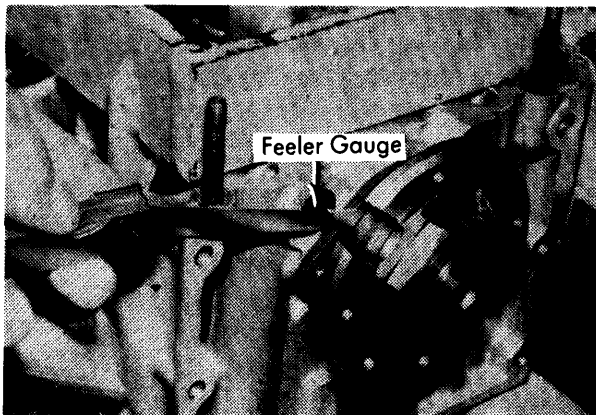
Using Feeler Gauge to Check Camshaft Endplay
